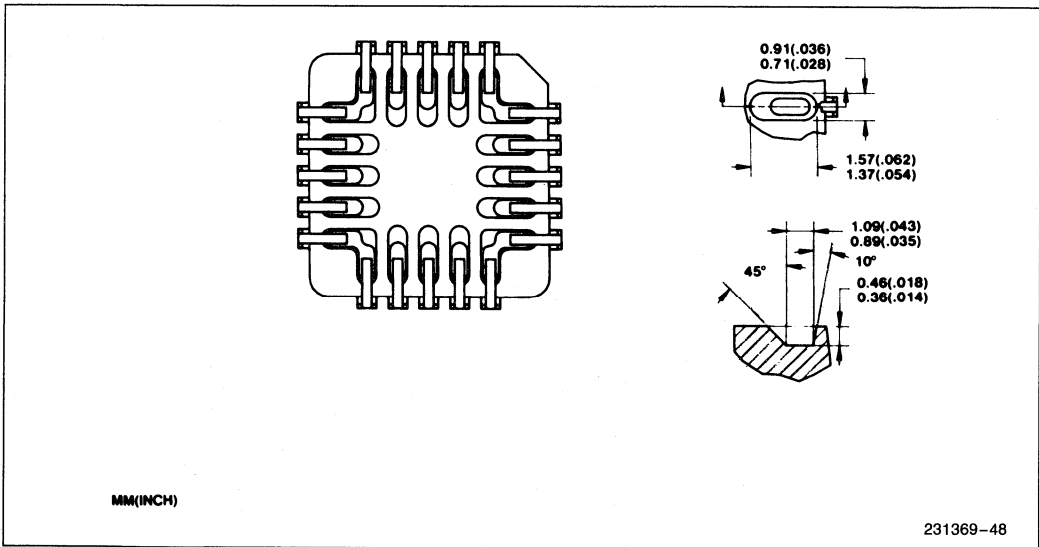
A. Standard Package Bottom View (Tooling Option I.)
